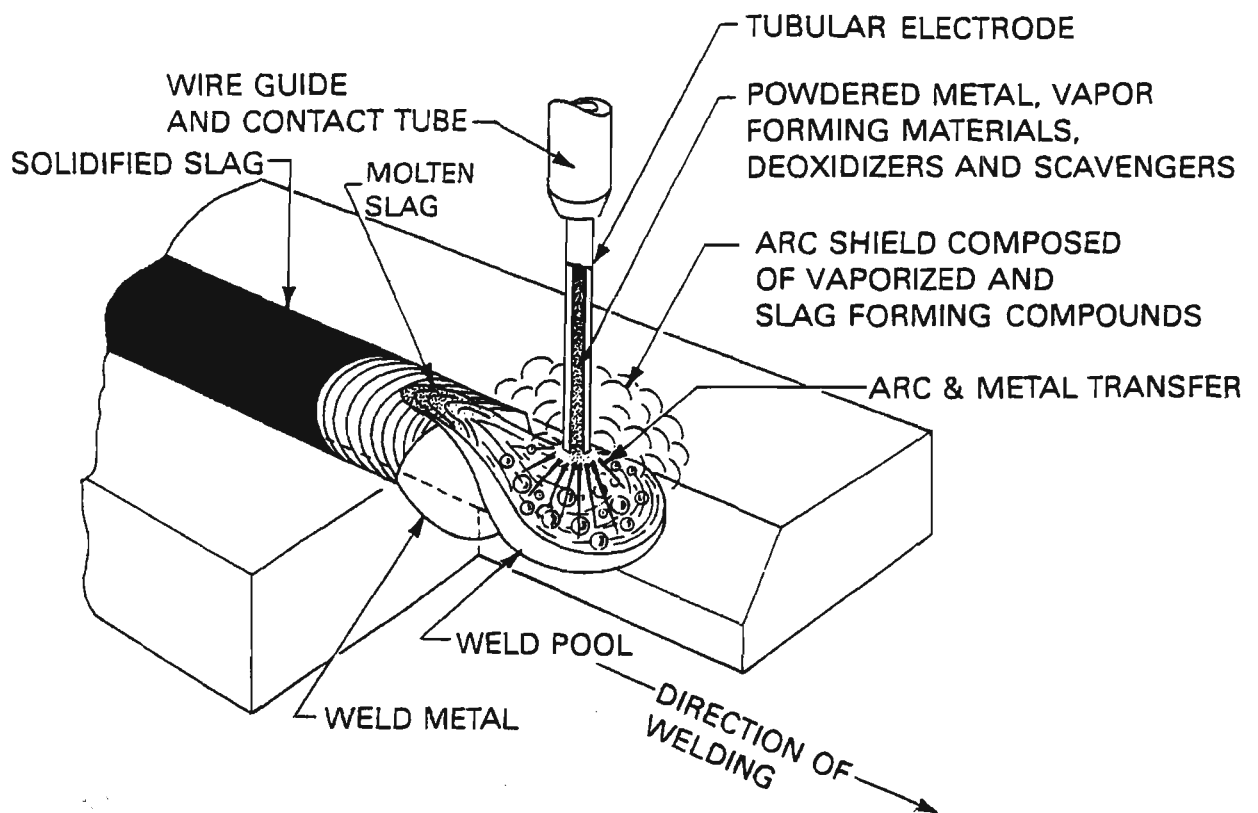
(a): Self-shielded flux cored arc welding (After Welding Handbook 1991).
